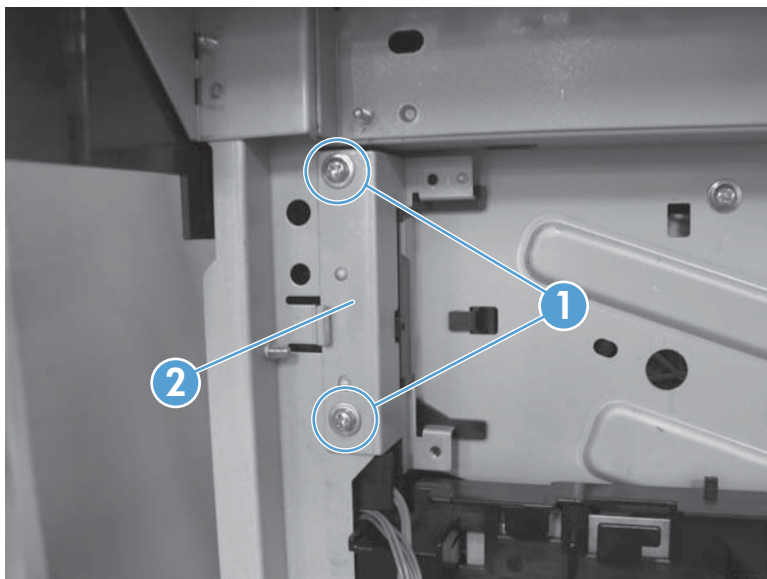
Remove the left door interlock switch (4 of 4)
